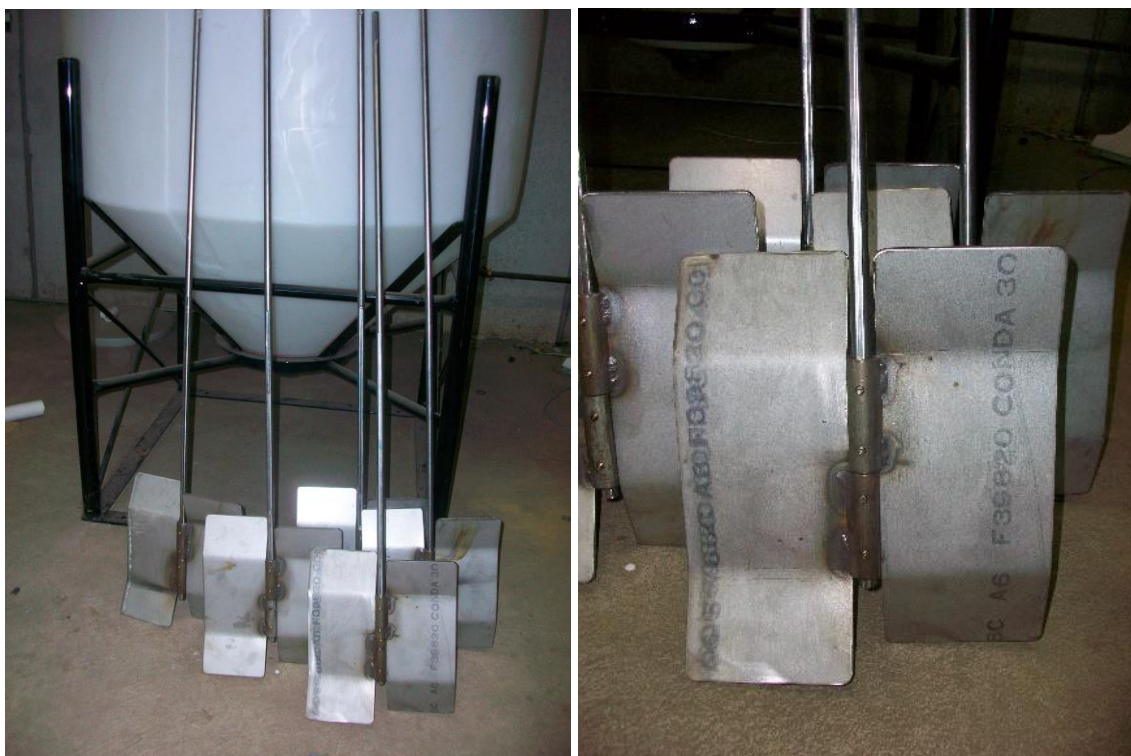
View of beveled blade (25 cm diameter) steel stir rods.
